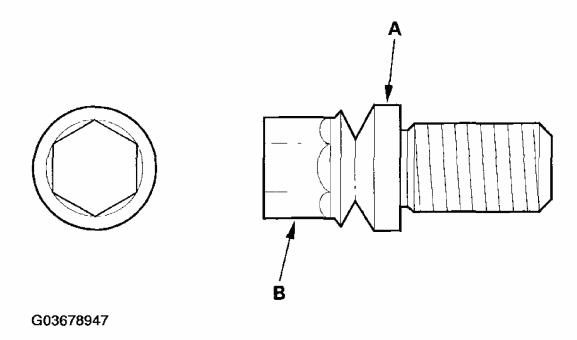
Identifying Shear Bolts And Hex Heads Courtesy of AMERICAN HONDA MOTOR CO., INC.
